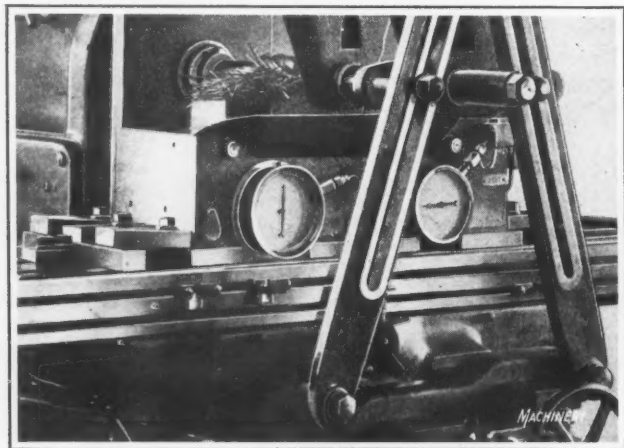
Milling Machine Dynamometer placed on the Market by the Cincinnati Milling Machine Co.
